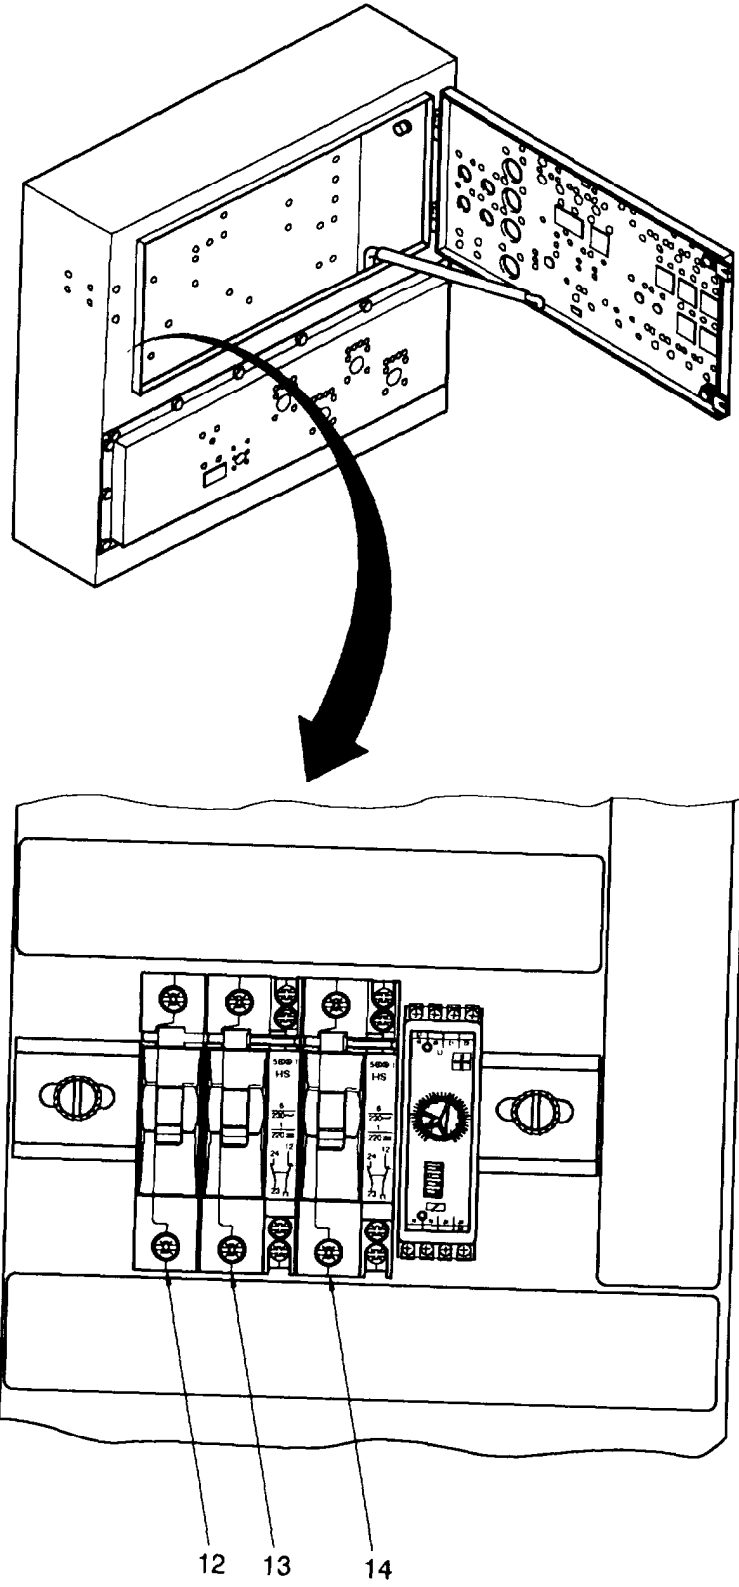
Control Cabinet Assembly, Circuit Breakers (sheet 2 of 2).
